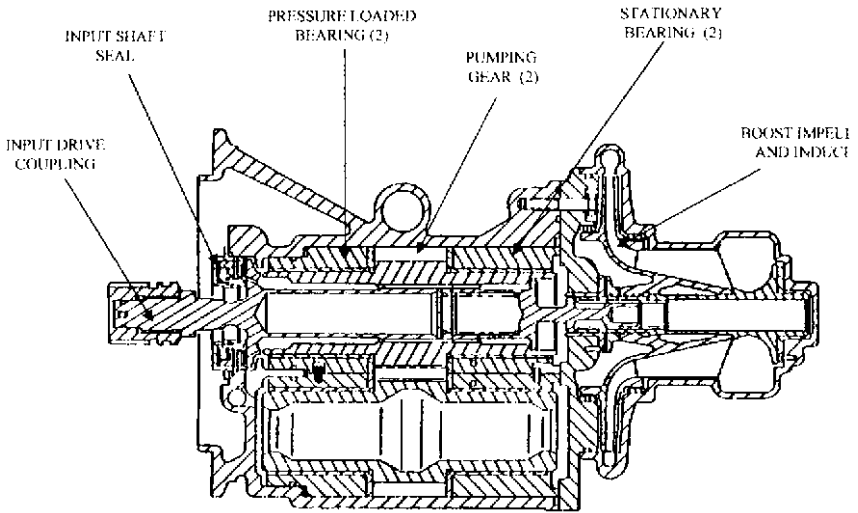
Main engine fuel pump cross section (Courtesy Hamilton Sundstrand)
